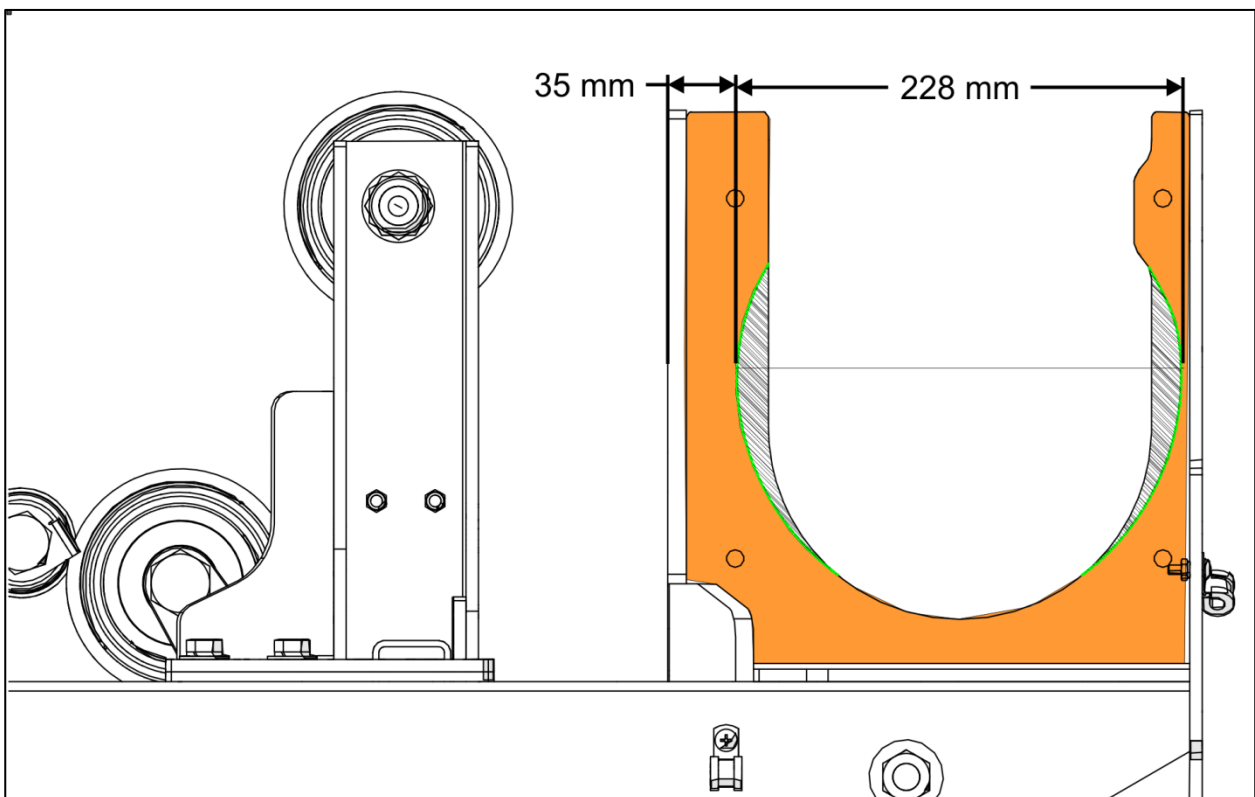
LONG FAN DRIVE SUPPORT. DIMENSIONS APPROXIMATE-
